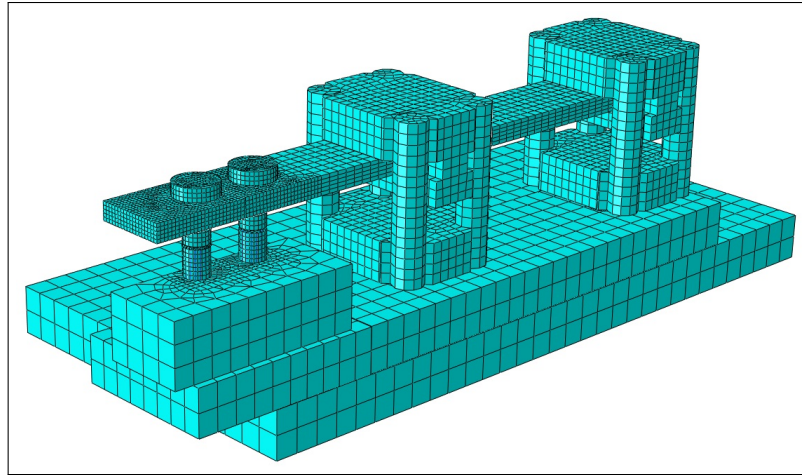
Finite Element model of workpiece, adhesive joint, and fixture
